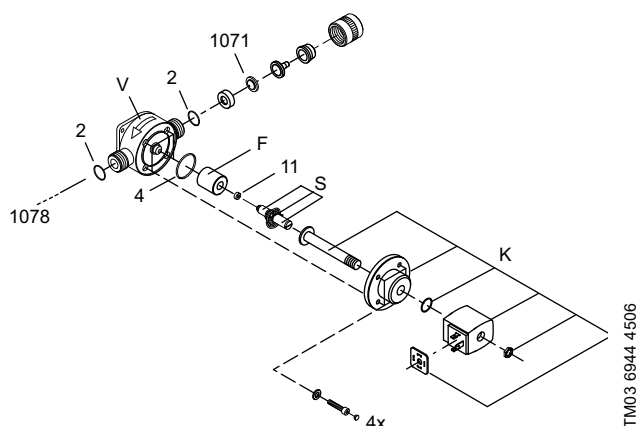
Solenoid valve (OCD-162-5, -10): exploded view
